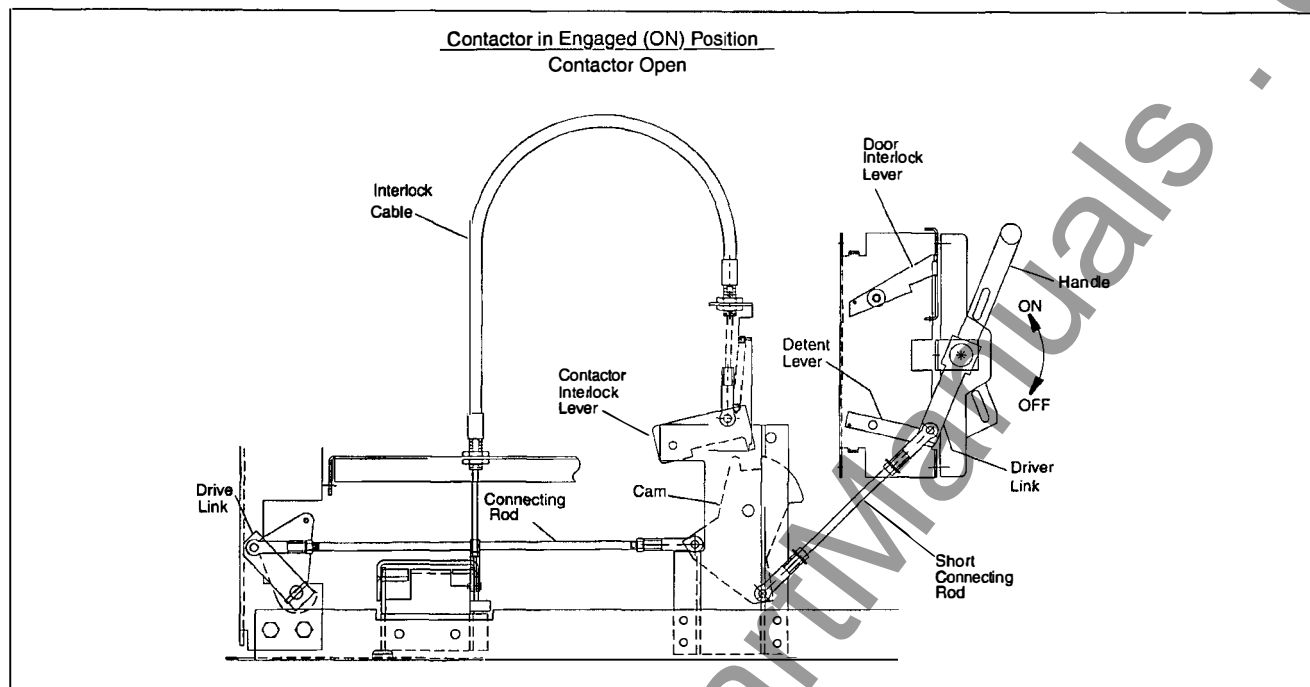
97H3 Racking Mechanism - Handle in ON Position (Directly Actuated Interlock)
